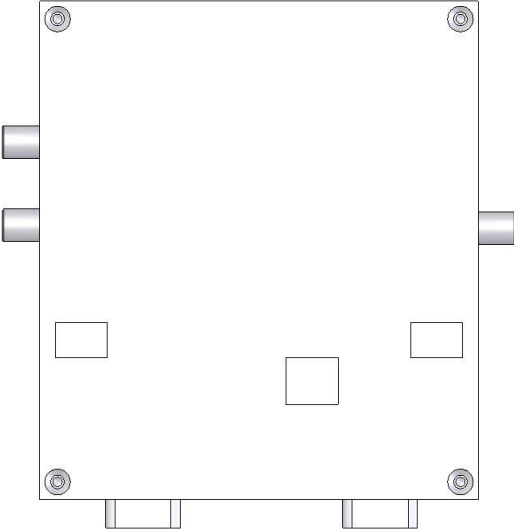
Top view of the TEC070 TEC072 laser head.
